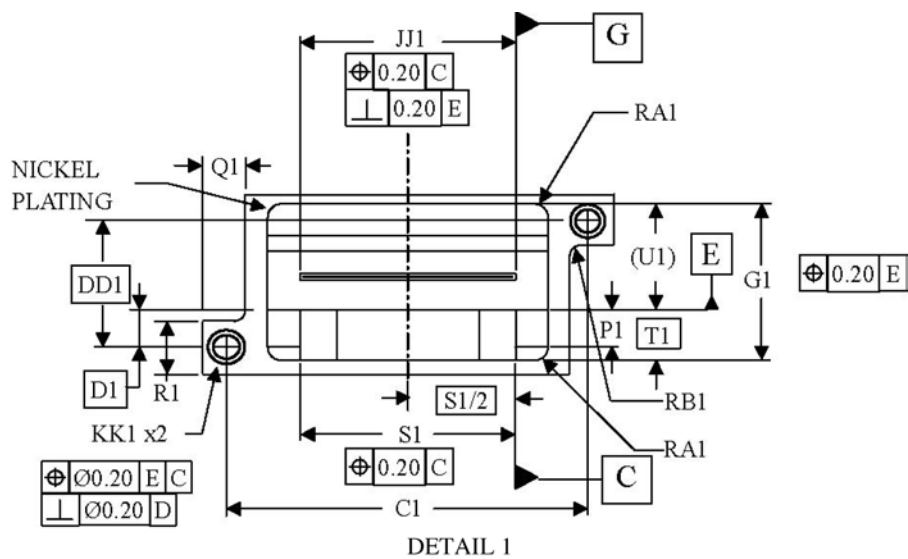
Mechanical dimensions of Side Elevation Transceiver.
